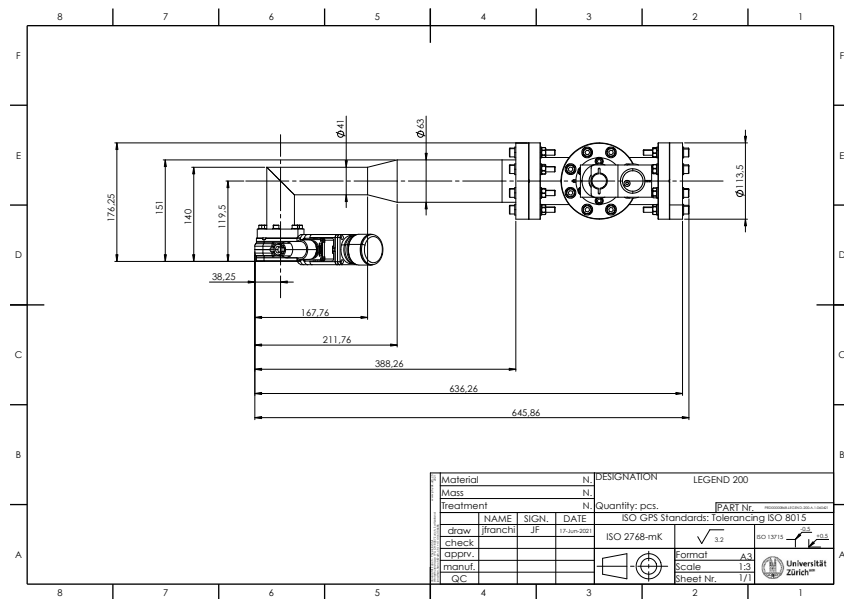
Drawing of the L-200 SIS used to deploy the calibration sources designed and machined at UZH, with the exception of certain subcomponents, which were purchased commercially. The drawing was made by J. Franchi, and the overall SIS design was made by the UZH workshop.
